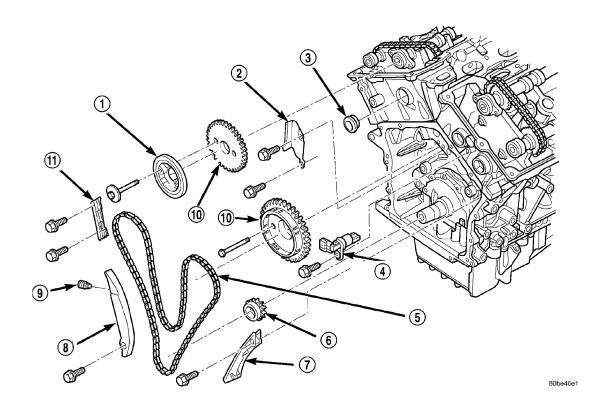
Identifying Primary Timing Drive System Components Courtesy of CHRYSLER LLC
